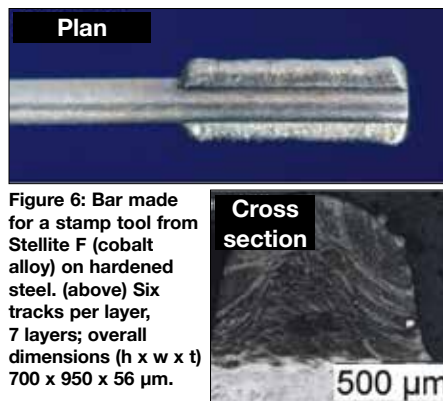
Bar made for a stamp tool from Stellite F (cobalt alloy) on hardened steel. (above) Six tracks per layer, 7 layers; overall dimensions (h x w x t) 700 x 950 x 56 μm.
